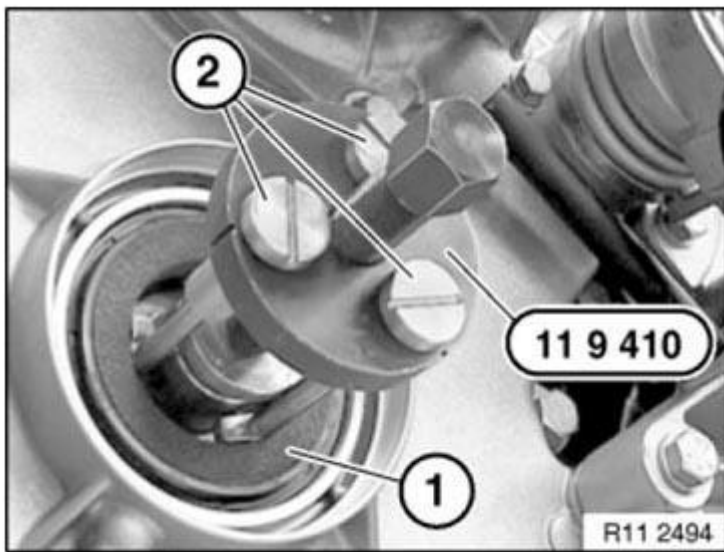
Positioning All Levers Horizontally To Pull Off Radial Shaft Seal
